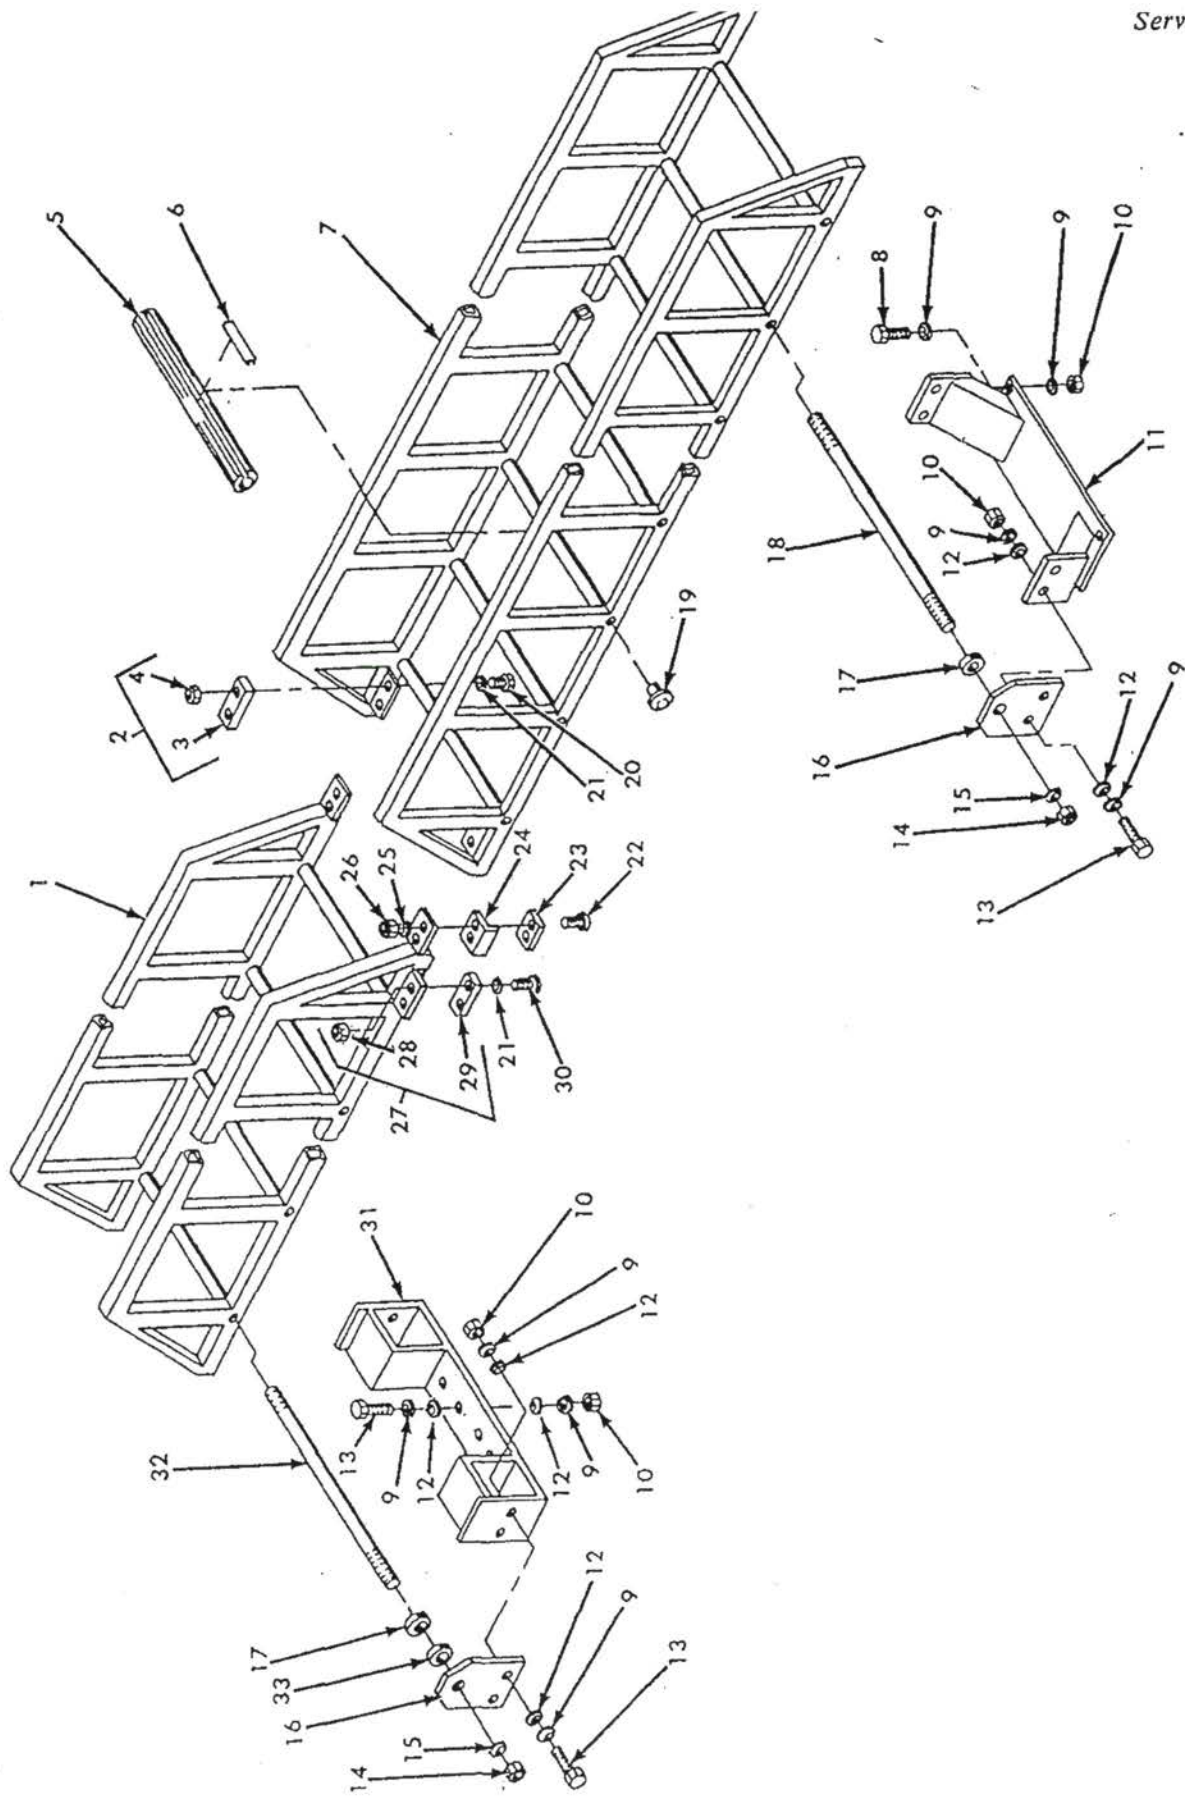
STEEL LADDER ASSEMBLY MOUNTING (CONFIGURATION 1)
